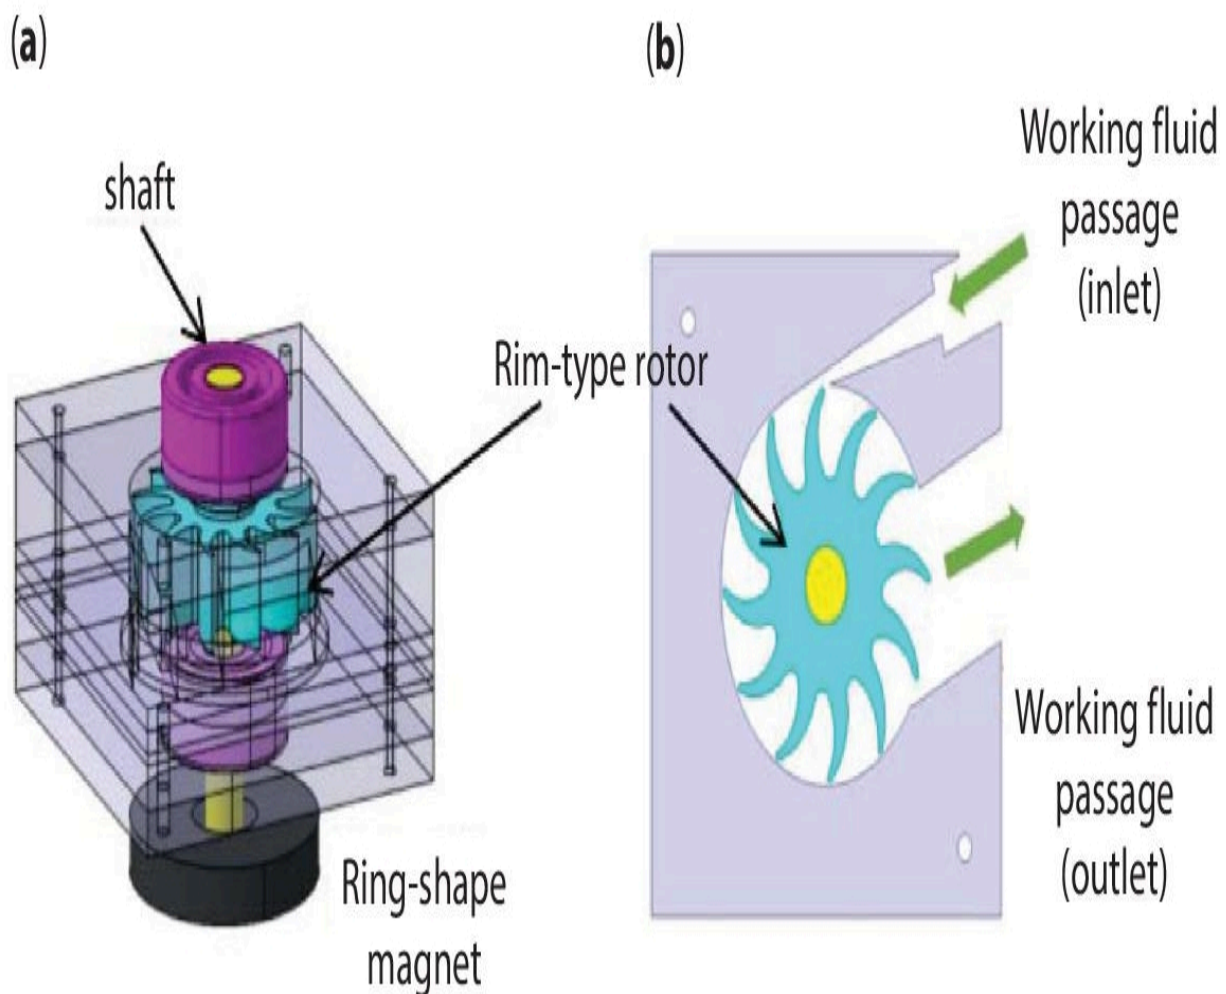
Designed single-phase turbine (a) arrangement of parts (b) rotor blade and a flow path pattern.
